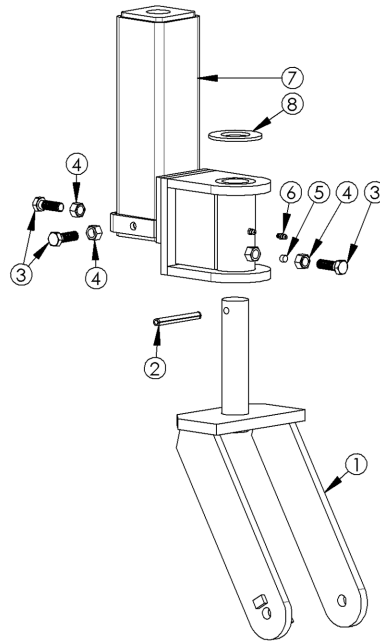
Pneumatic Wheel Kit, 5-Lug Hub
